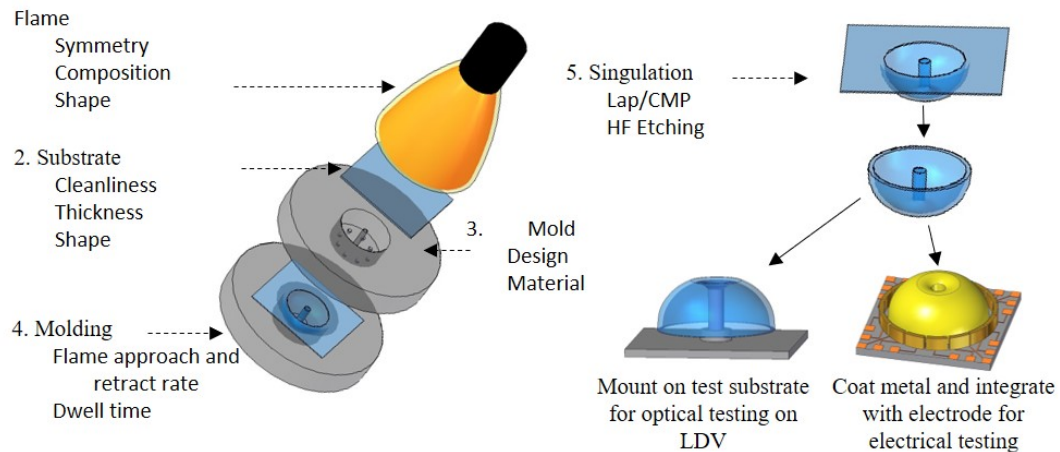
Key components and steps to fabricate PSI resonator using blowtorch molding.
